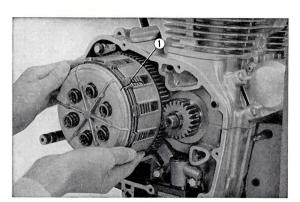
Removing friction disc and clutch plates (1) Friction disc and clutch plates
